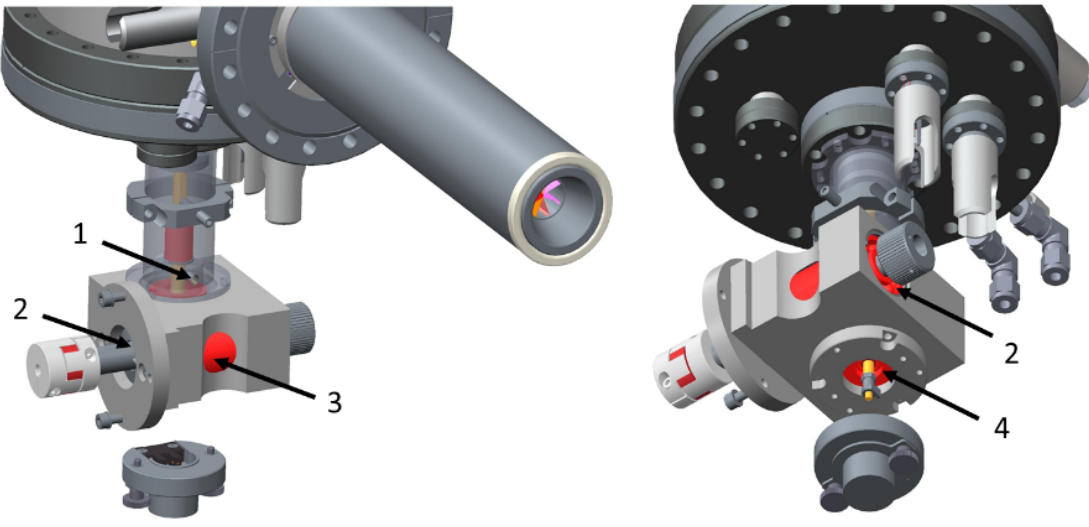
Schematic of the arsenic cracker driving valve. The following parts (highlighted red) require lubrication after bake-out: 1. Linear bearings (accessed via the hole), 2. Radial bearings (x2), 3. Worm gear, 4. Radial bearing.
